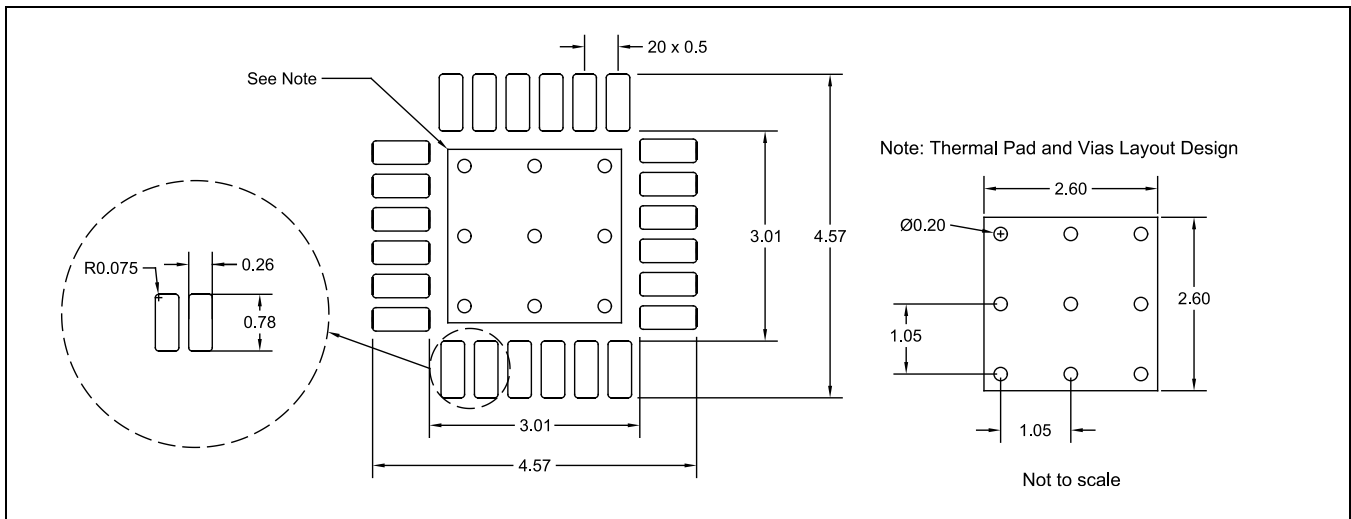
QFN 24L 4.0mm x 4.0mm soldering footprint (NOT TO SCALE)
